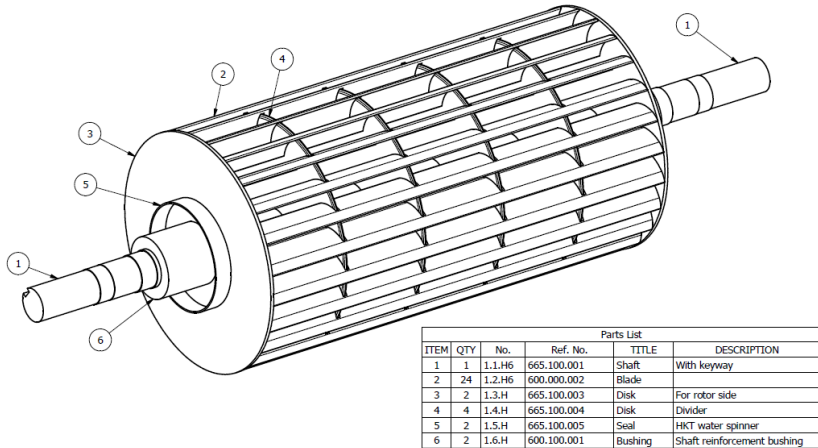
Image of the rotor from the technical drawings supplied by RHL. The bushing is indicated at 6.
